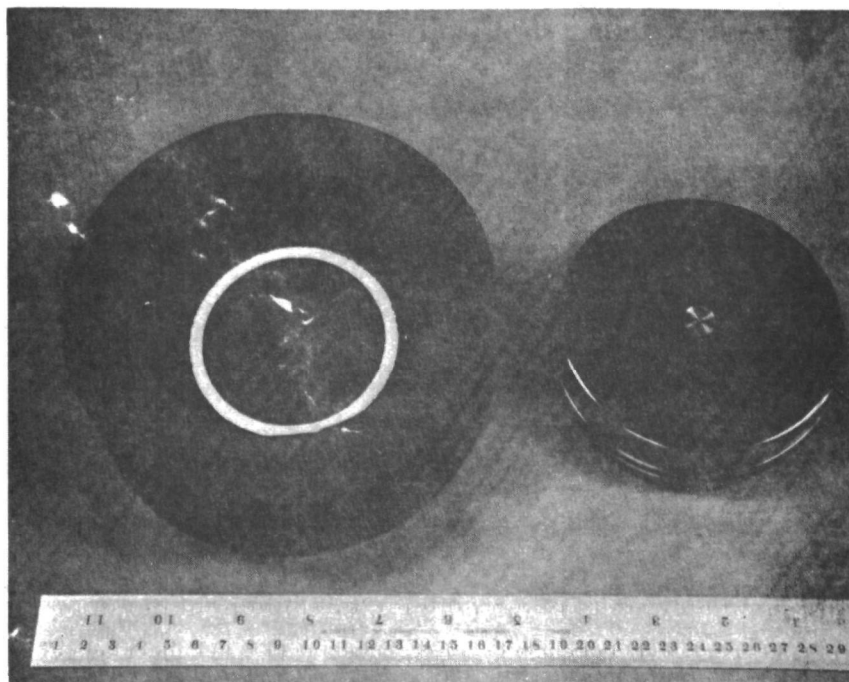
Photograph of a Rubber Die and Sealing Plug
